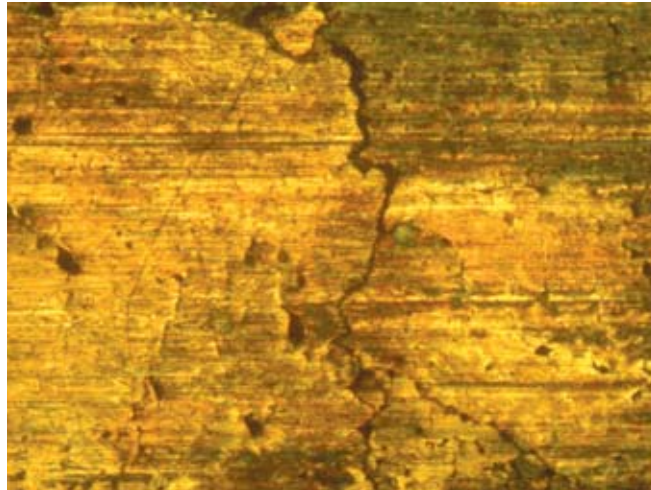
Fatigue cracks on the MB11 slide layer (after test on the SMOK test stand-enlargement of the picture from Fig.3)
